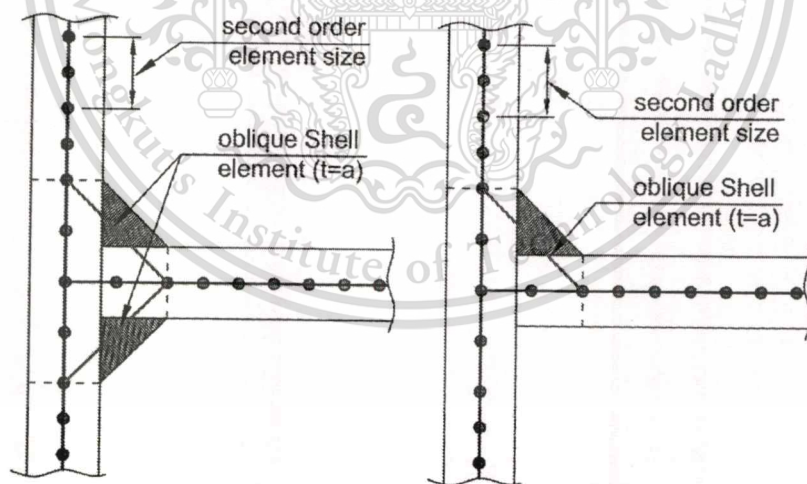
Weld modeling using oblique shell elements (Niemi, 1995).
